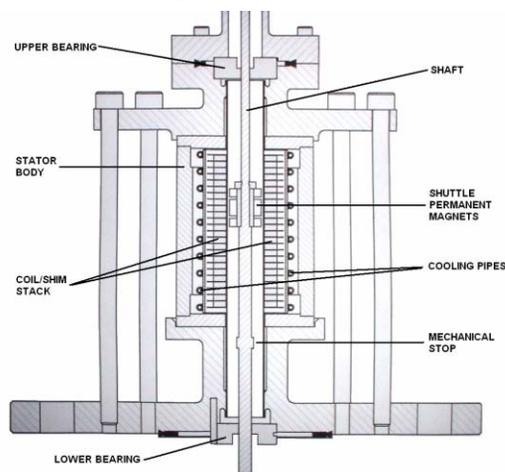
The stator mounted in its supporting flanges. The stator body with its end caps measures 90mm. (Note that the full length of the target shaft [560mm] and the optical readout block are not illustrated.)
